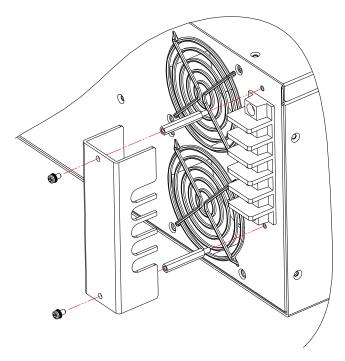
Assembling 62050P Input Terminal Safety Cover
